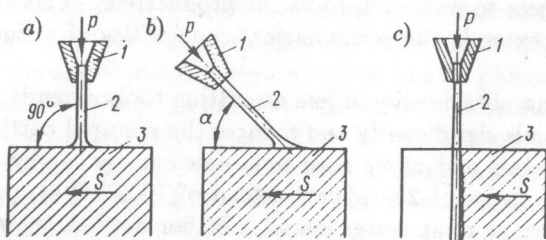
Schemes of jet action on machined material. 1) nozzle; 2) jet; 3) machined material.
